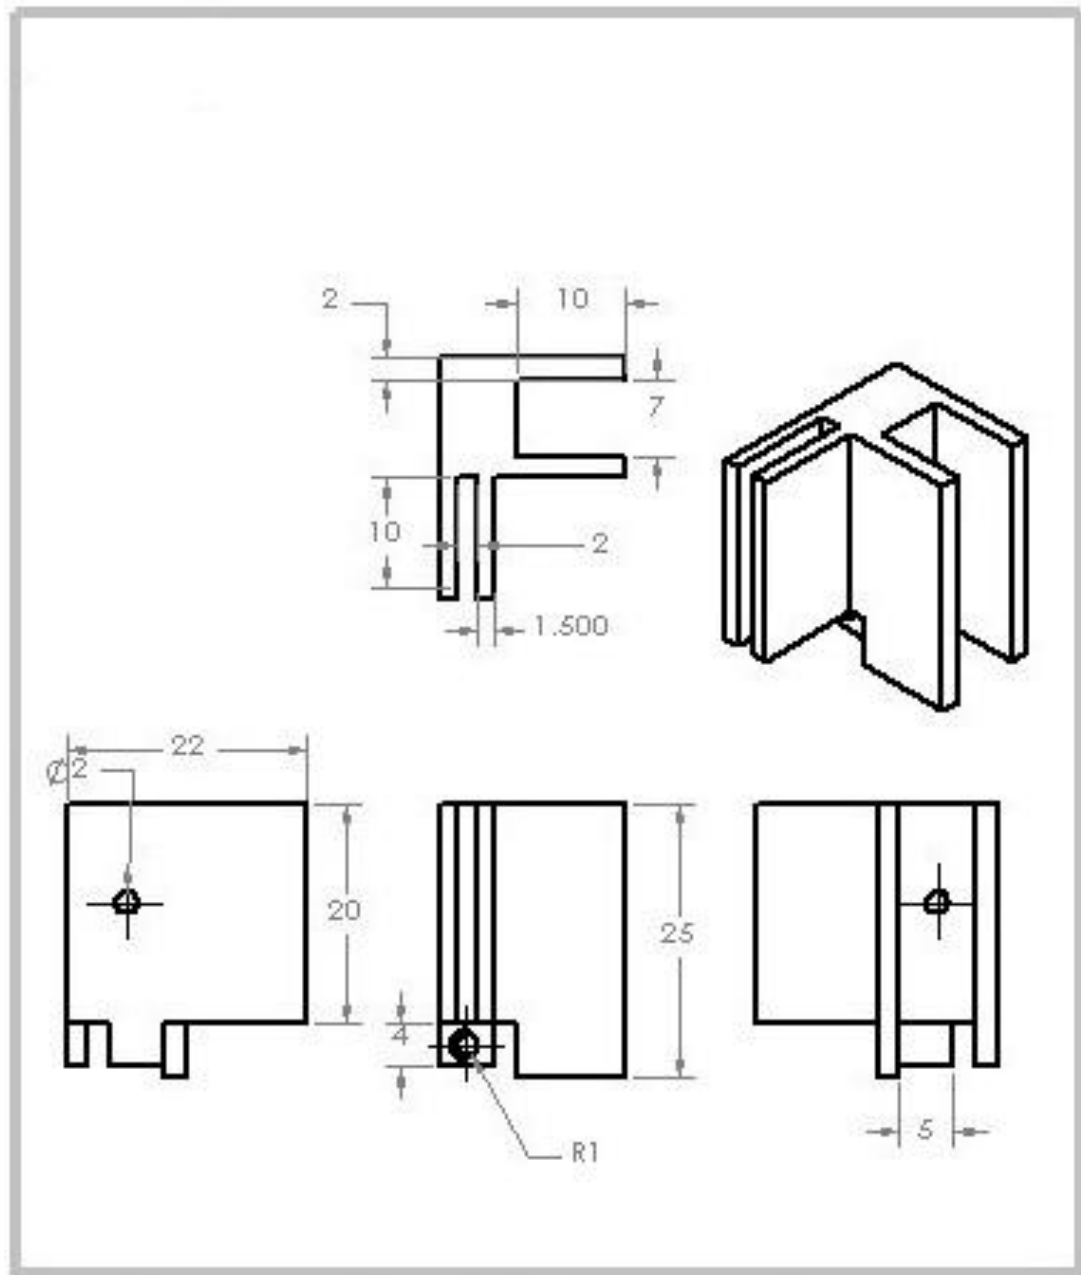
Technical drawing of the moving part 01 of the external nozzle
